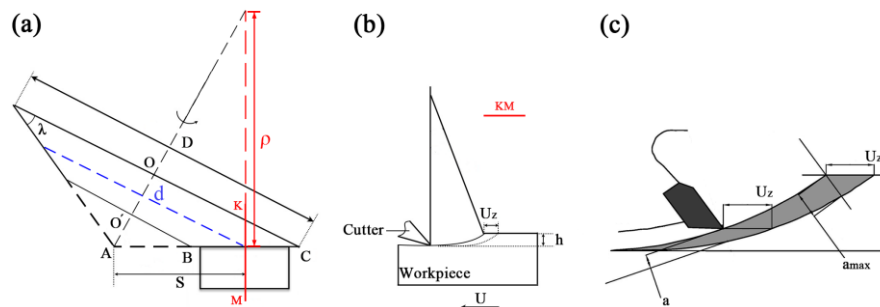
Motion analysis of the tapered milling: (a) taper milling, (b) cross-section KM of taper milling, (c) feed per tooth and chip thickness.
